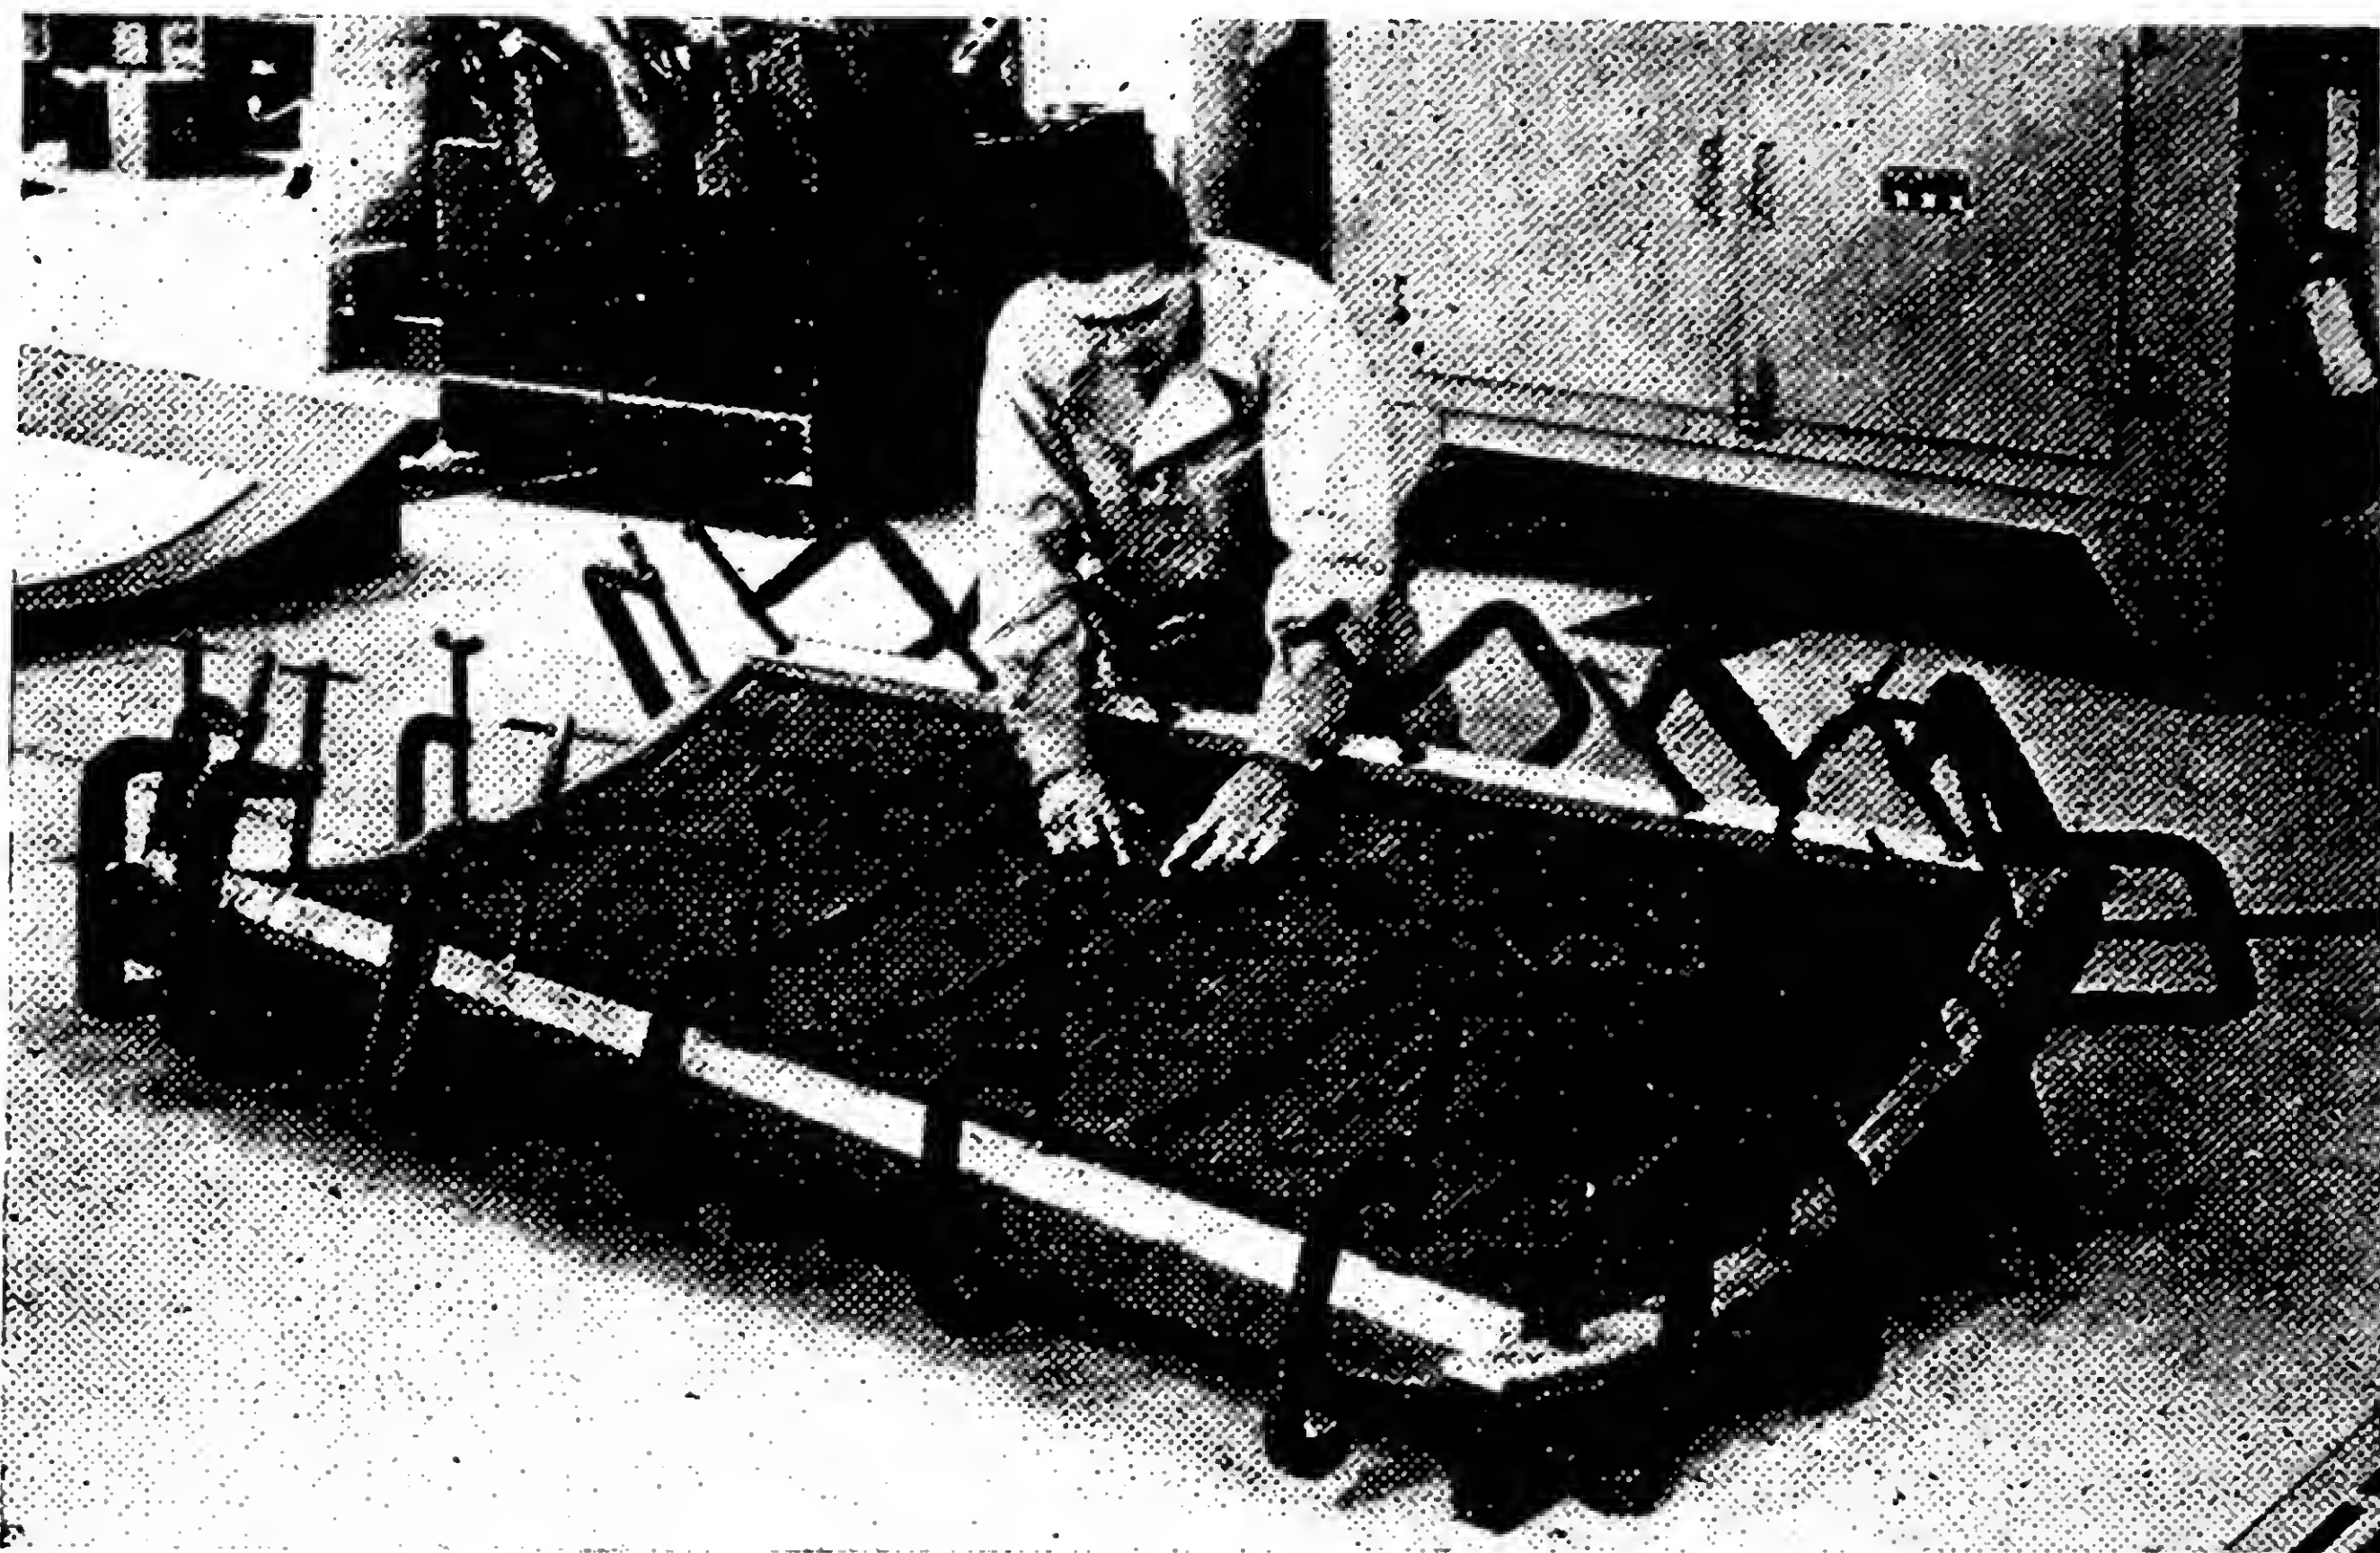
Illustrating a flexible blanket over a mold fastened with metal clamps.
